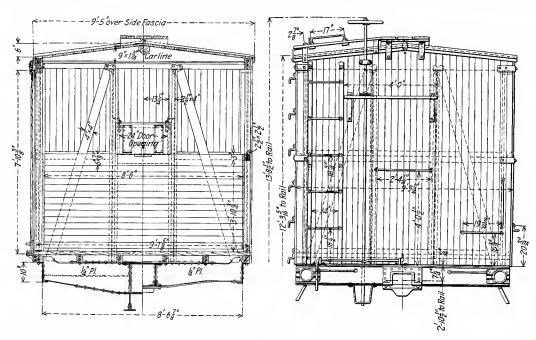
Cross Sections and End Elevation of Steel Undertrame 40-Ton Capacity Box Car Shown in Fig. 278.
